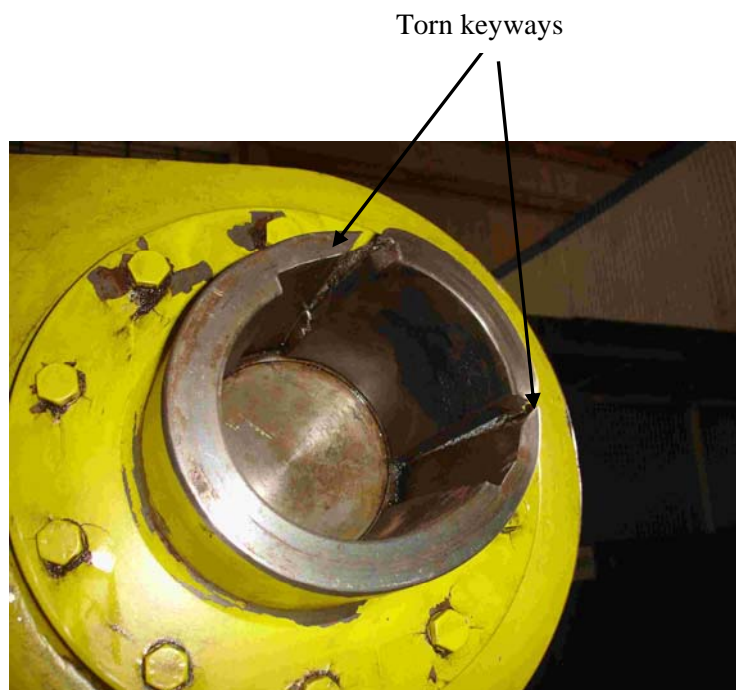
Deformed Upper Coupling with Both Keyways being Torn Apart
